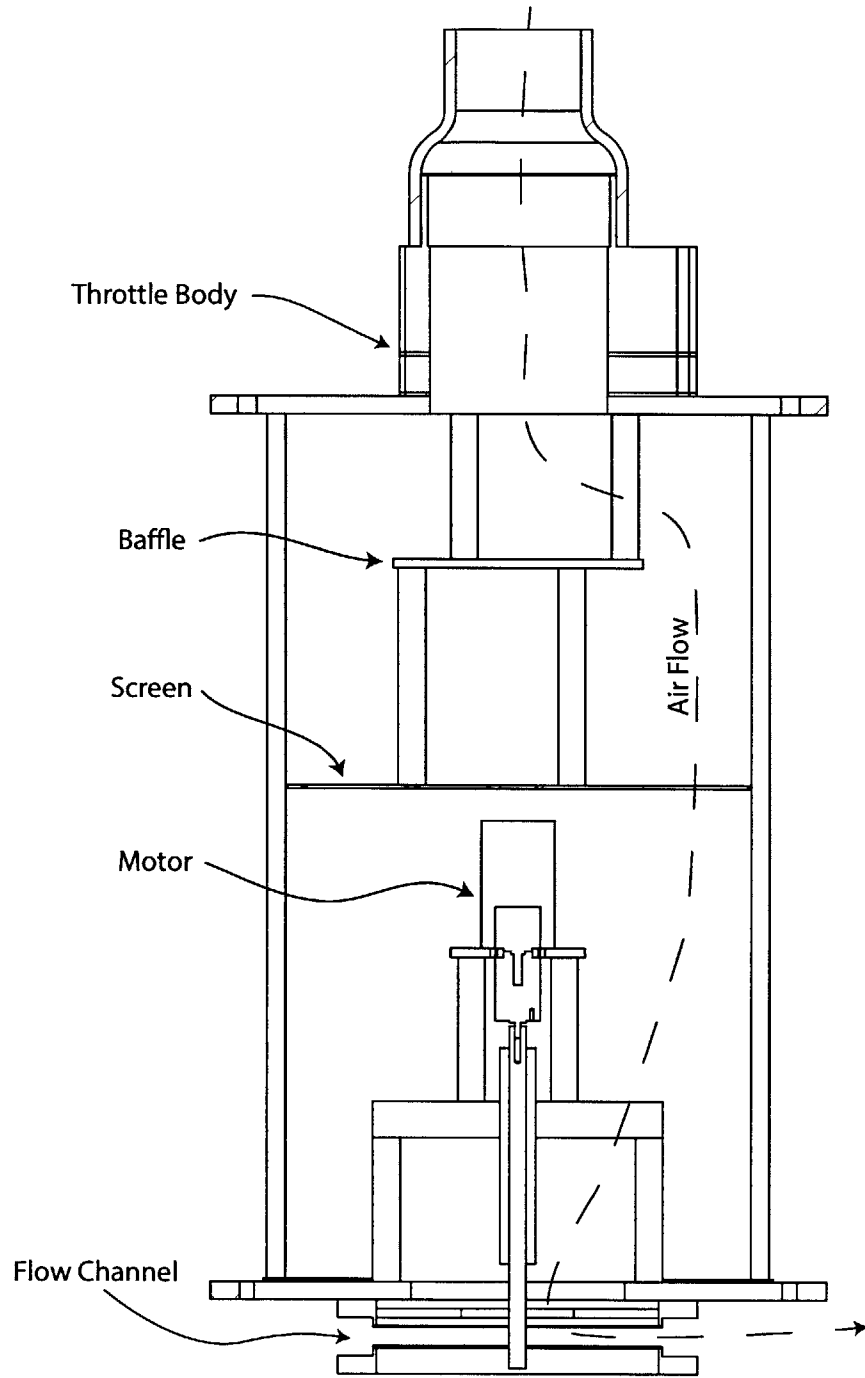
A cross section of the air plenum, with relevant structures labeled.
